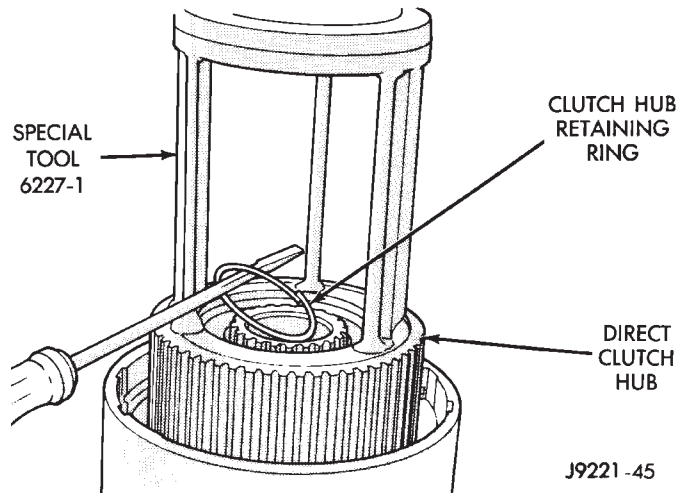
Direct Clutch Hub Retaining Ring Removal
